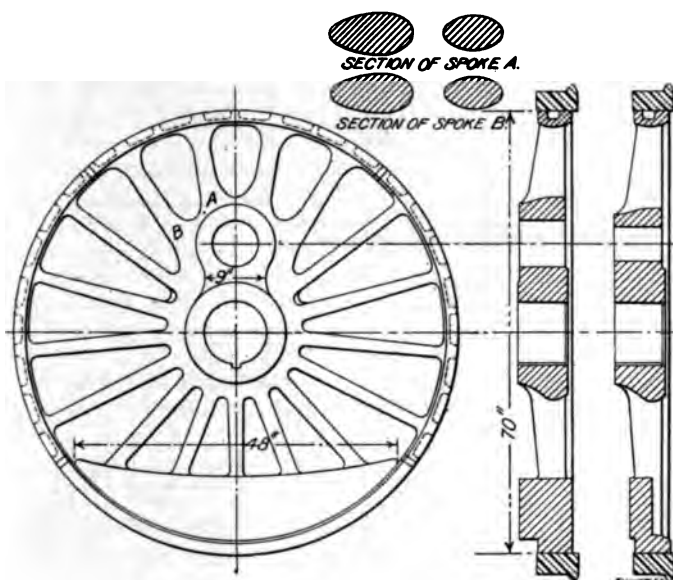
Cast Steel Driving Wheel Center for Atlantic Type Locomotive
